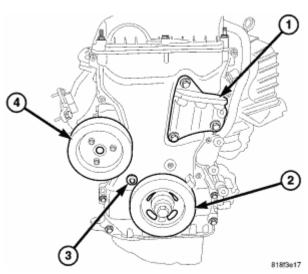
ENGINE FRONT Courtesy of CHRYSLER LLC
